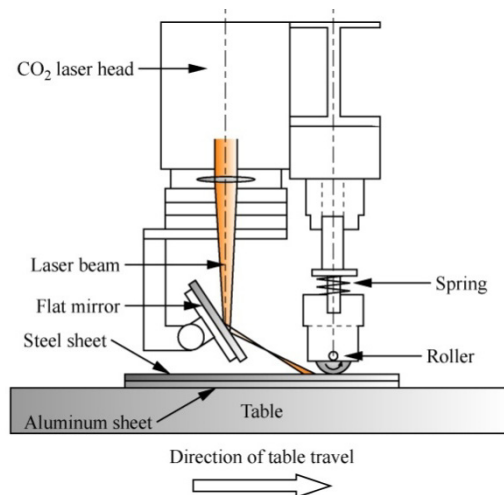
Schematic diagram of Laser Roll Welding process
